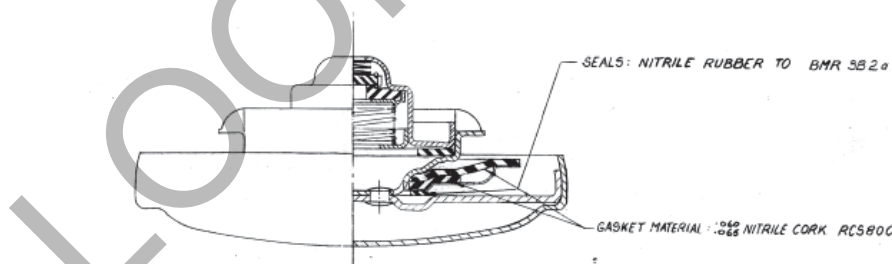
Fuel tank filler cap AYG2343.
